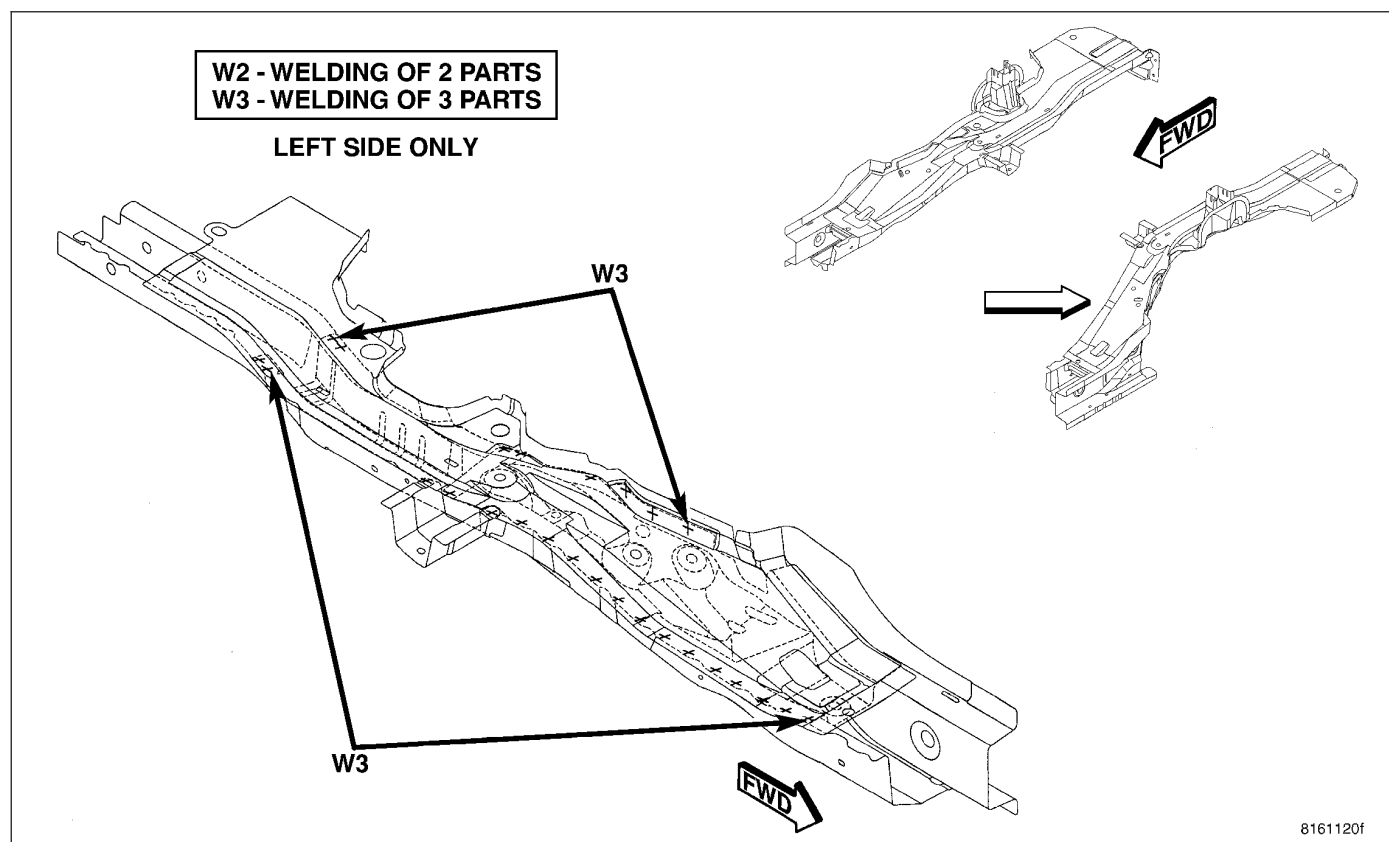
SIDEMEMBER ASSEMBLY (14 OF 17)
